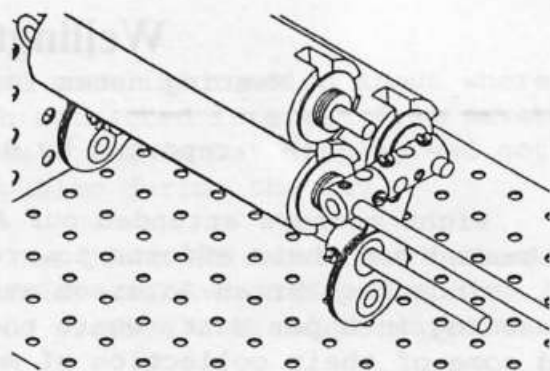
One side of the frame supporting the pressure roller has been removed to clearly reveal the journal support for the third roller
